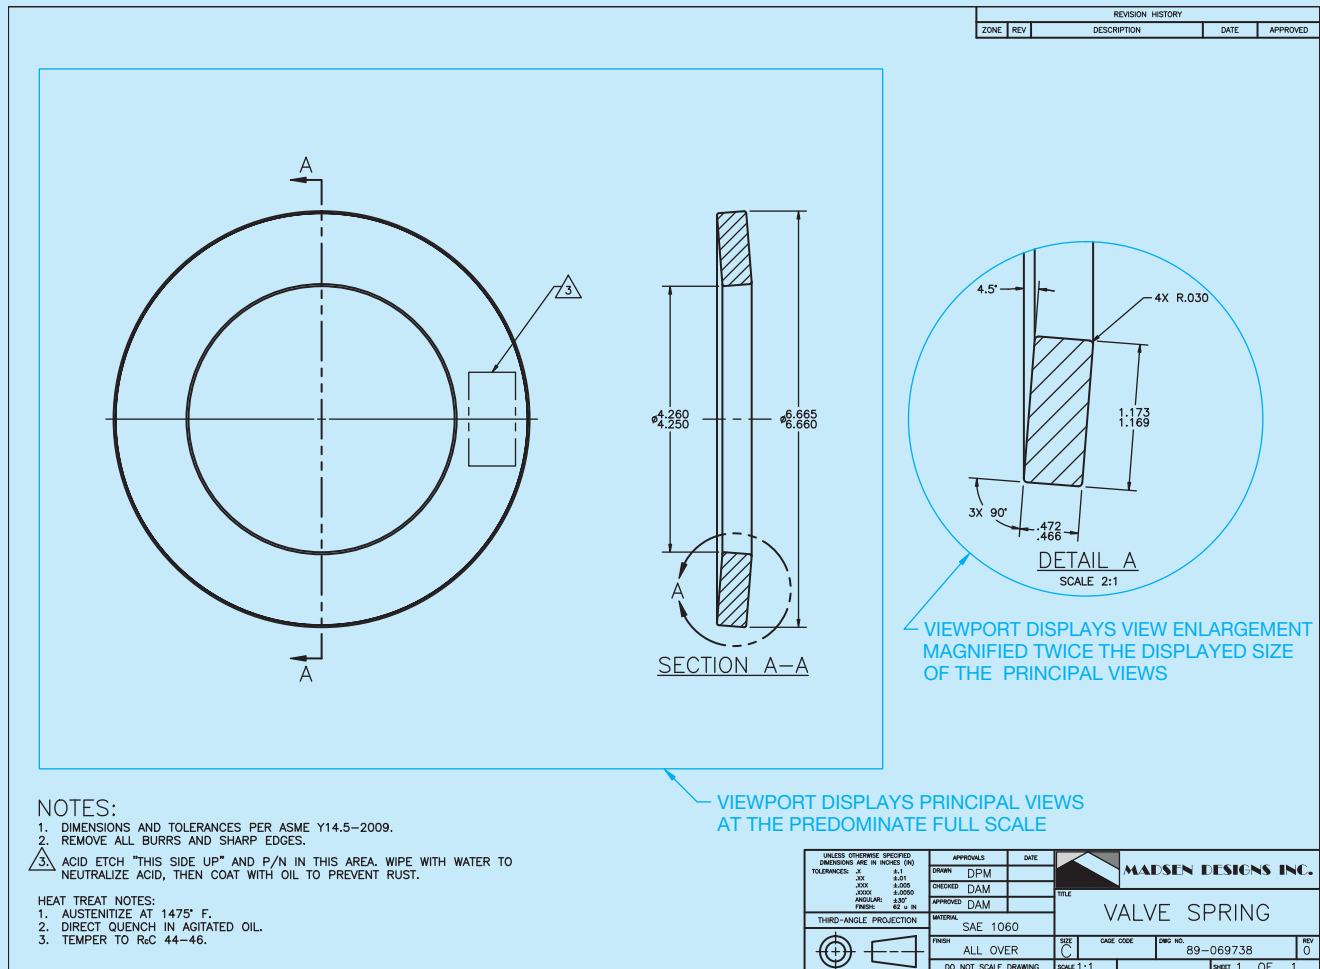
An example of a multiview part drawing with a view enlargement created using AutoCAD floating viewports in Paper Space (Layout). Courtesy Madsen Designs Inc.
